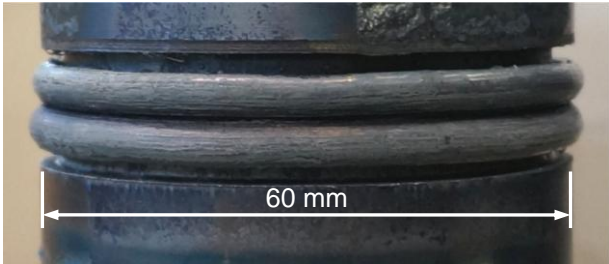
Visual inspection of weld flash prior to heat treatment
